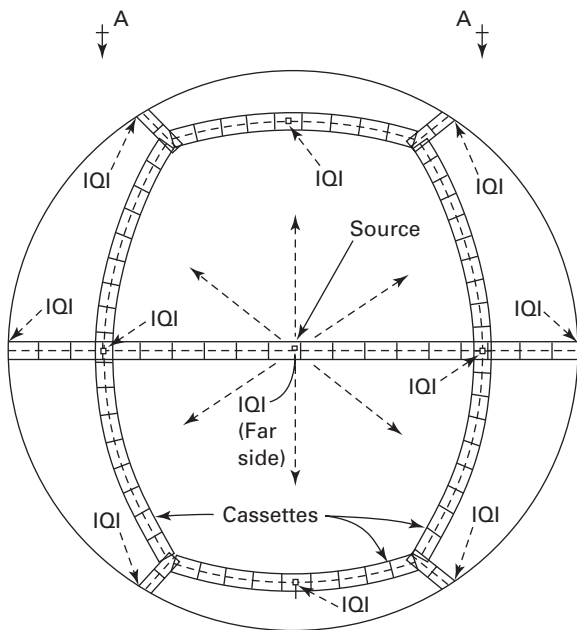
WELDS IN SEGMENTS OF SPHERICAL
